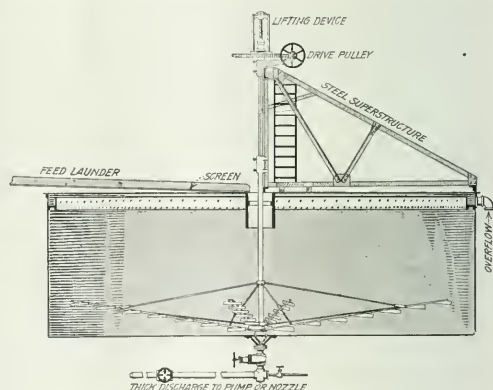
MECHANISM INSTALLED IN STEEL TANK
